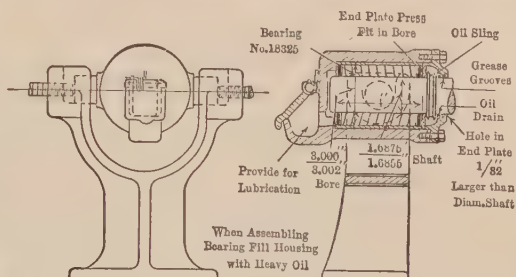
Oil Lubricated Roller Bearing for Flared Idler.
